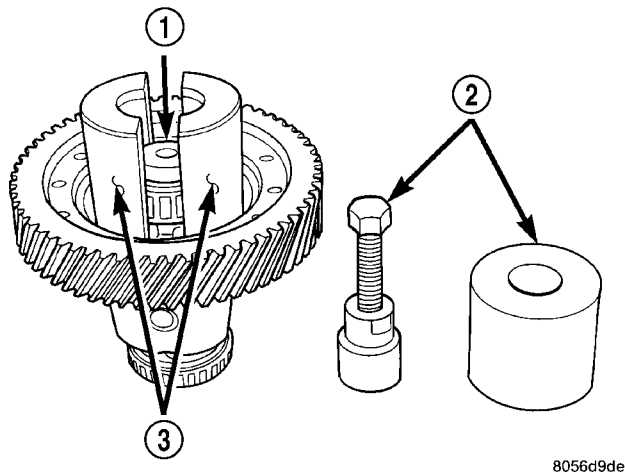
Checking Side Gear End Play (Ring Gear Side)
